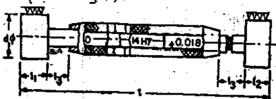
Inserted Type Plain Plug Gauge (Reproduced from IS: 3484)
